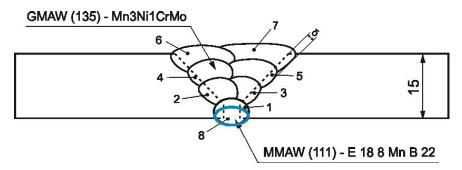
Deposition of the weld layers by the MMAW/GMAW technology
